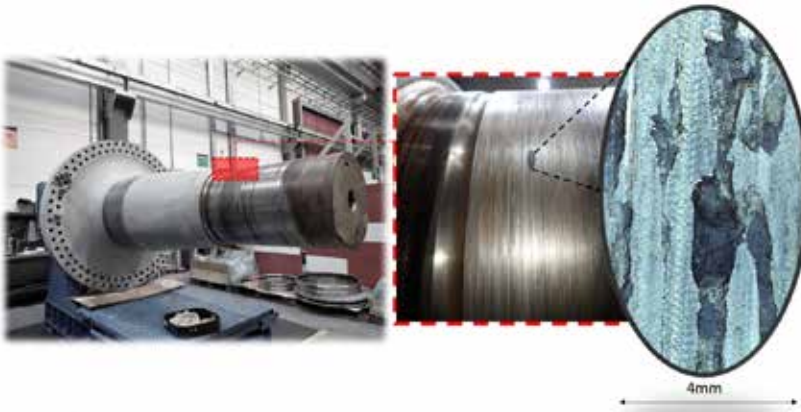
Fretting wear on shaft, under the main bearing inner race surface.
